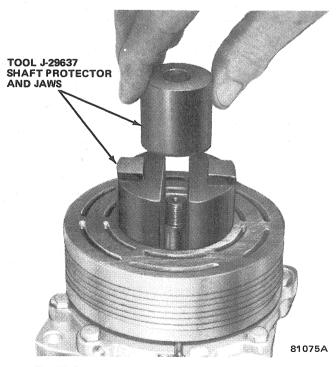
E-34 Removing Rotor Pulley with Jaws Installed
